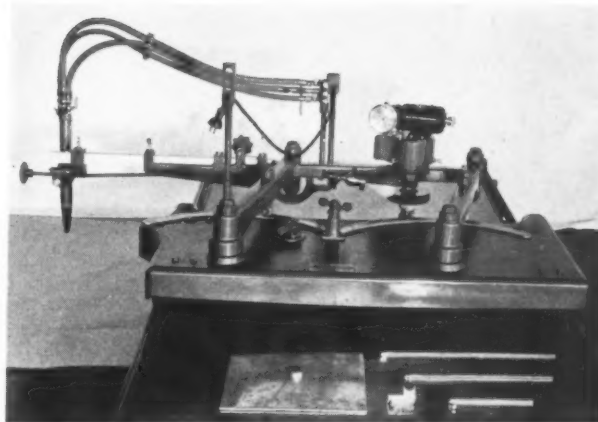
Improved automatic cutting machines have smooth, vibrationless operation
